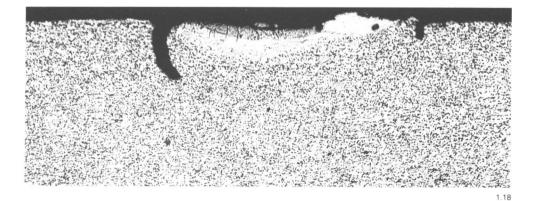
to 1.18. Bone drill broken by burn of electrical engraving tool
